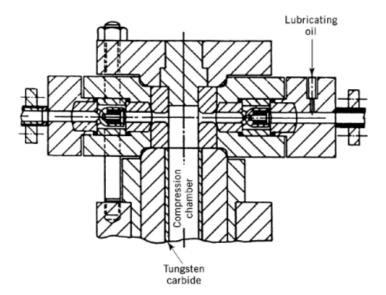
Precompressed cylinder head with radial inlet and outlet valves (174).
